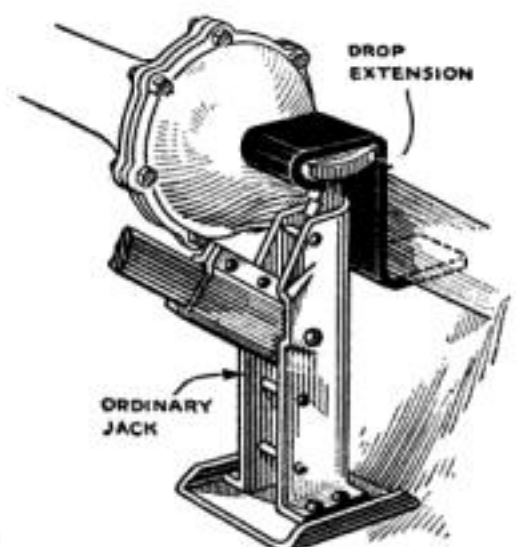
Heavy strap iron is bent to make drop extension for jack.
